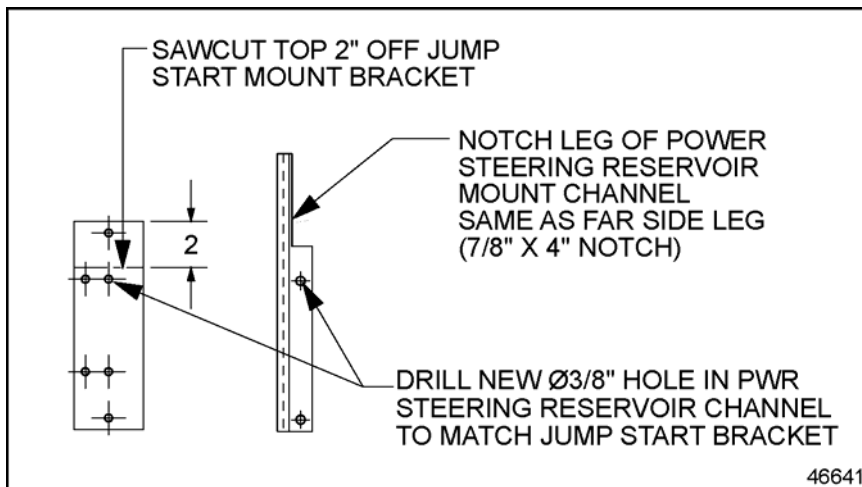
Modifying Power Steering Bracket and Jump Start Conn. Bracket
